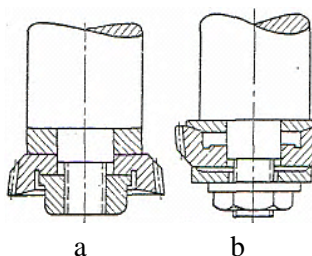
Ways to mount the shaper: a – thread bush; b – bolt fixture
